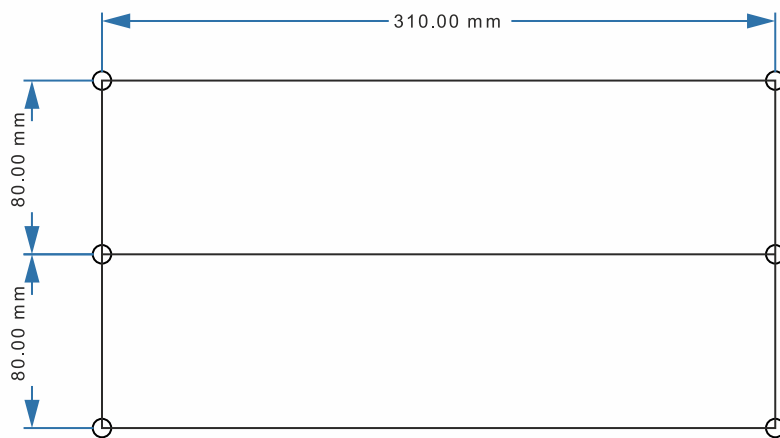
Drilling drawing for KLPHYB-H/KLPGT-H
